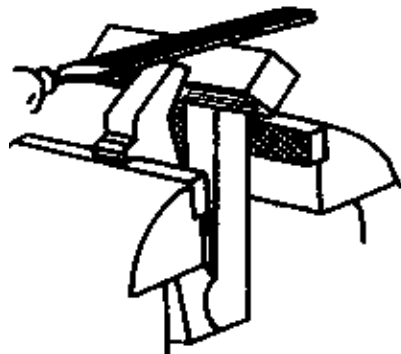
Filing of a chamfer on small workpieces by means of an angle vice
